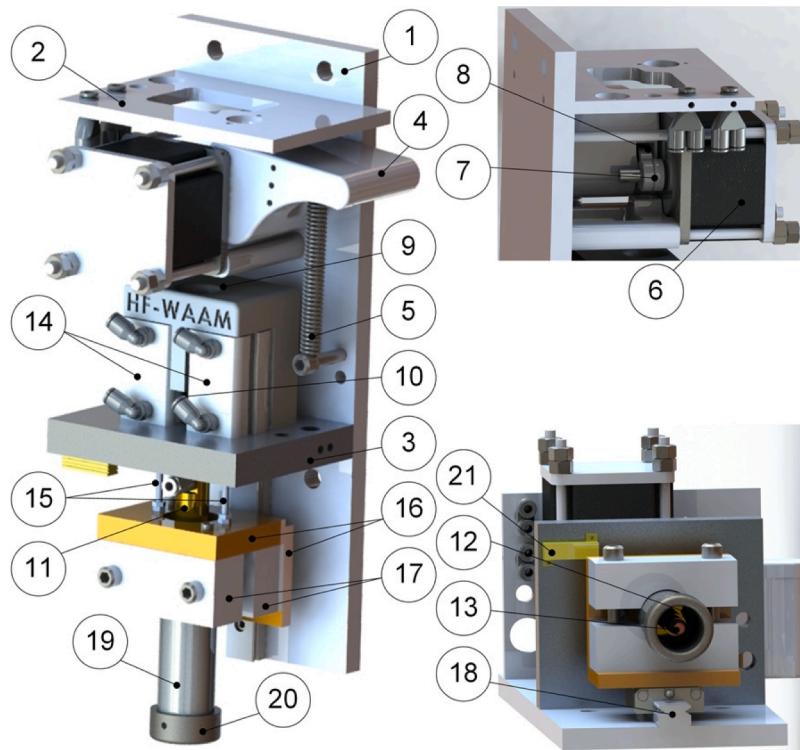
HF-WAAM torch represented in computer aided design (CAD) drawing.
